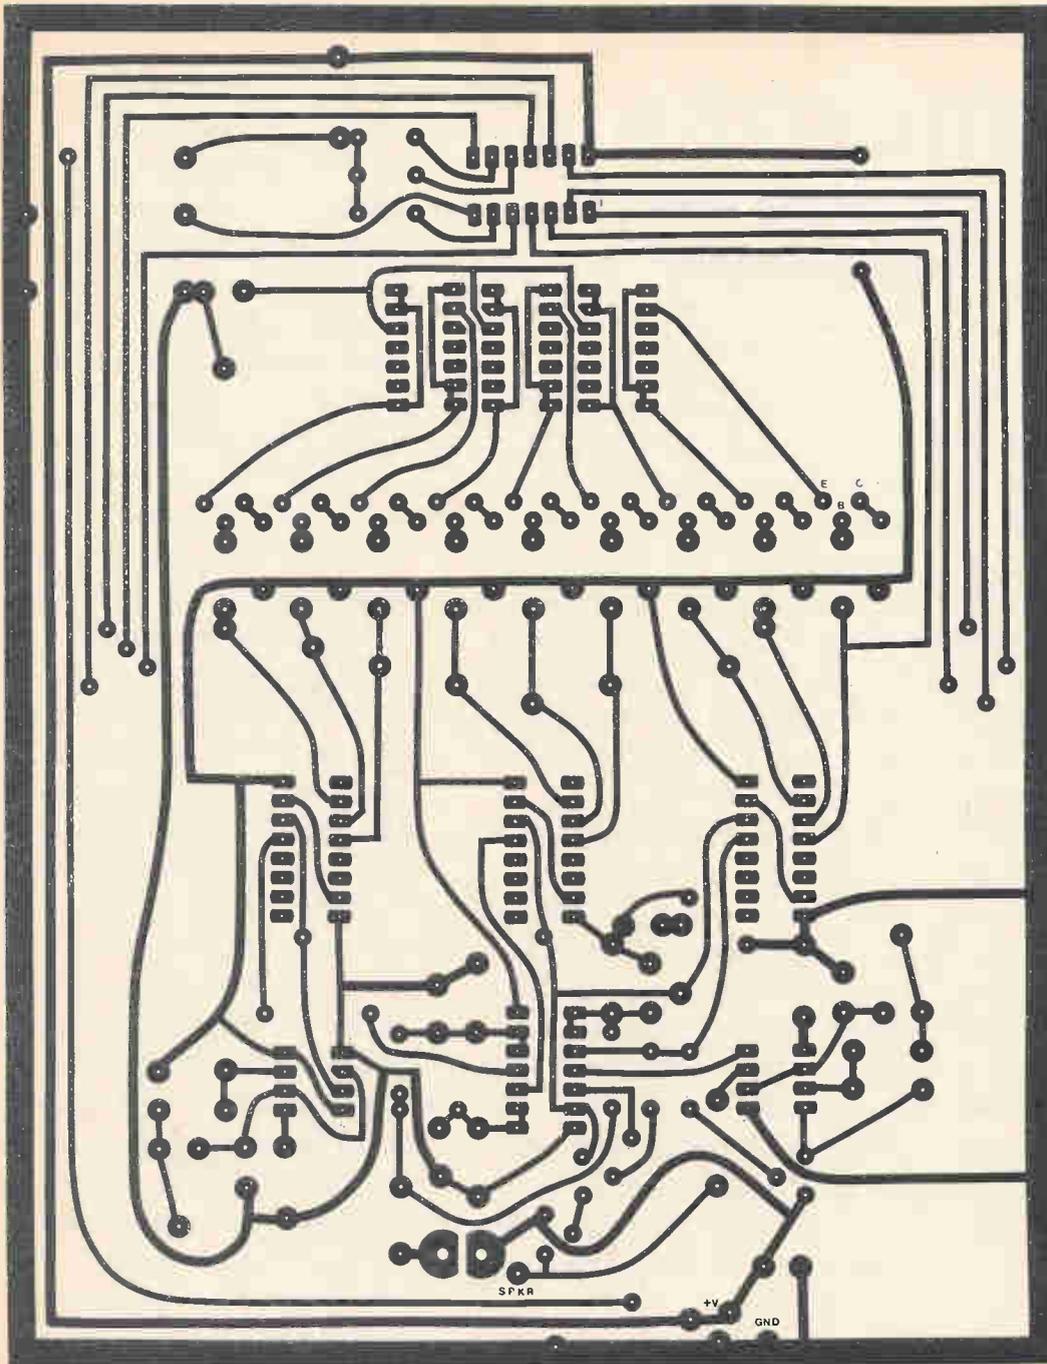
You can use this full-size foil pattern to make your own printed circuit board for the Electronic Slot Machine.
